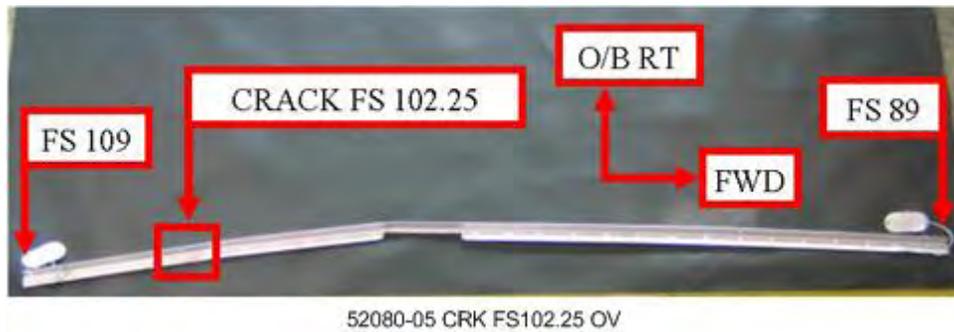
Location of Crack on the Center Fuselage Right Stringer FS 89 Through FS 109
